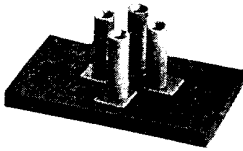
(left). Valve sockets are attached by counter-sunk screws to an ebonite plate to form the valve-holder.
